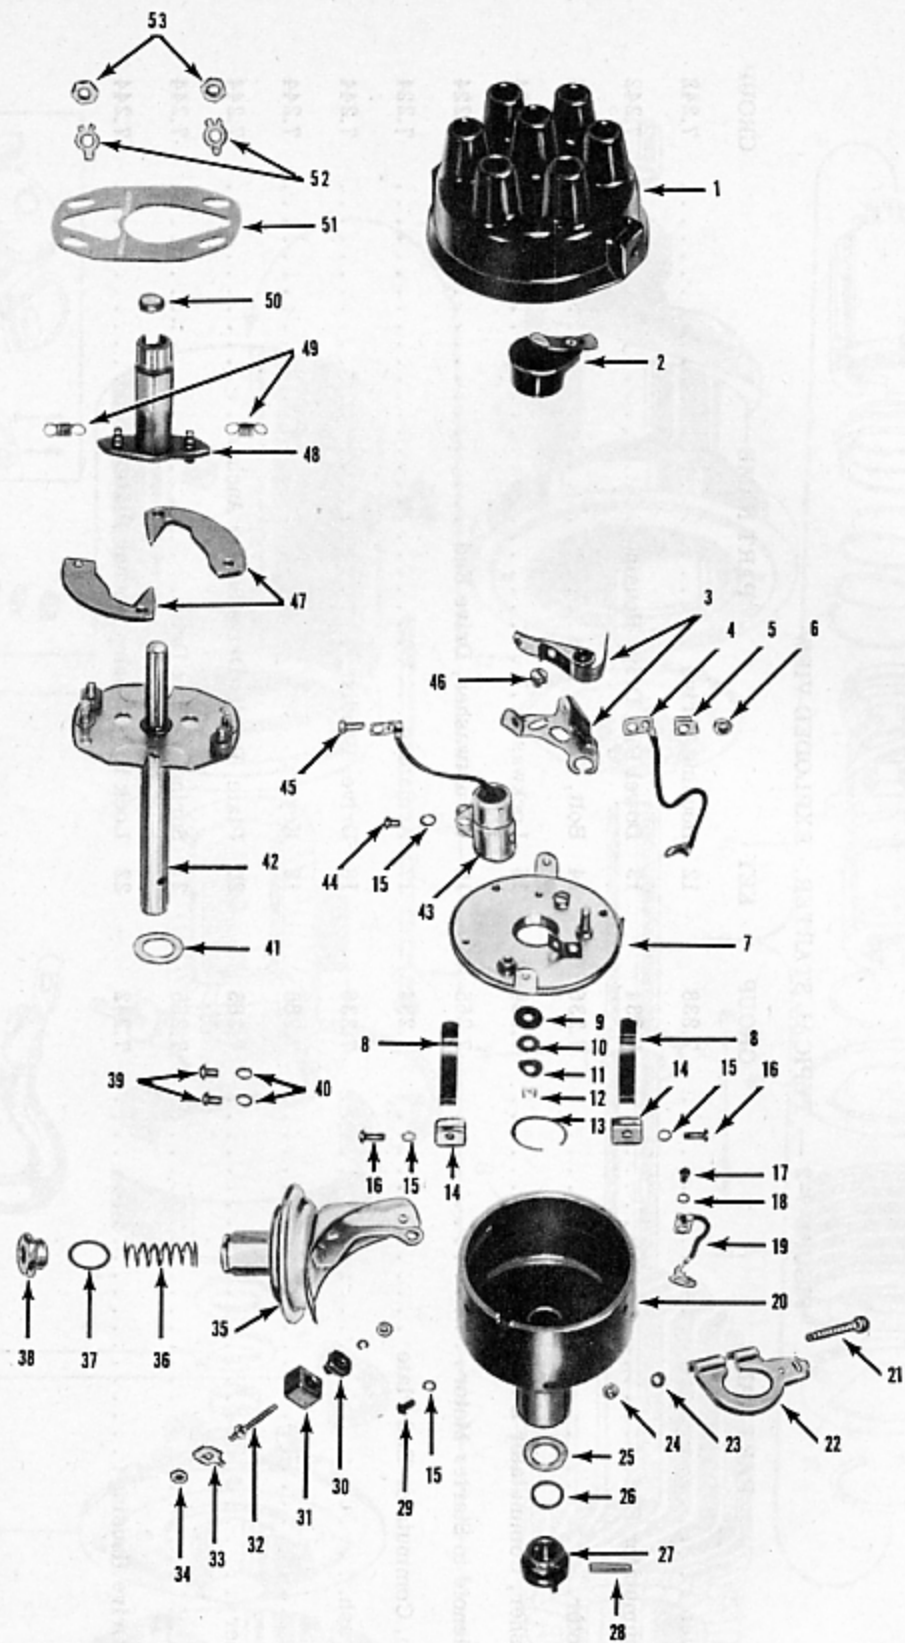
TYPICAL DISTRIBUTOR - EXPLODED VIEW
